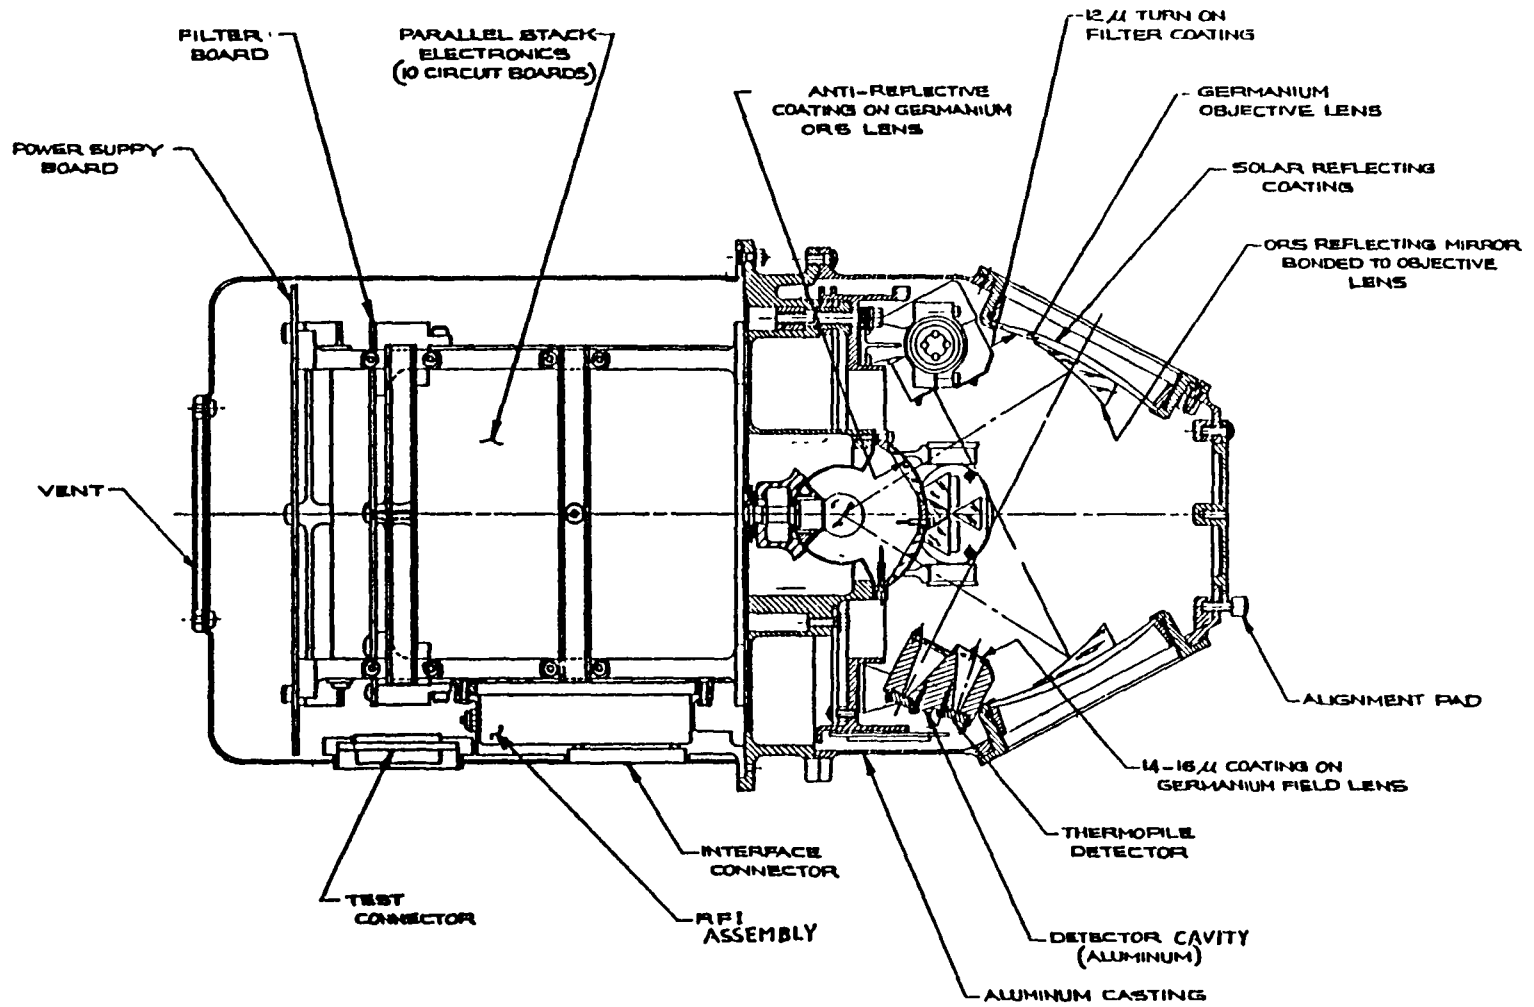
Cross-Sectional View of Earth Sensor Assembly
